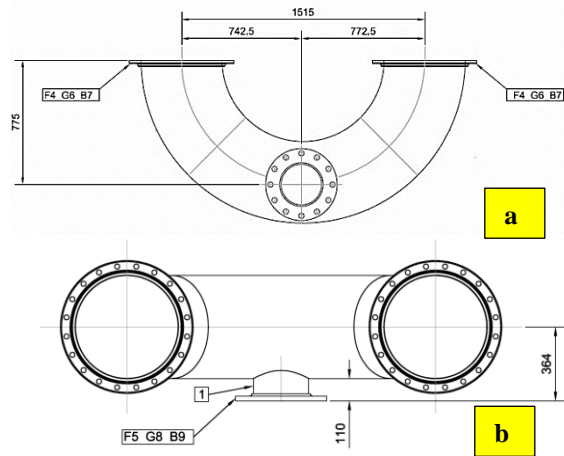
Dimensions and Material of A106 GR.B Carbon Steel Pipe (U Tube Seal Deck shaped) a. Upper cross section, b front cross section [6]
